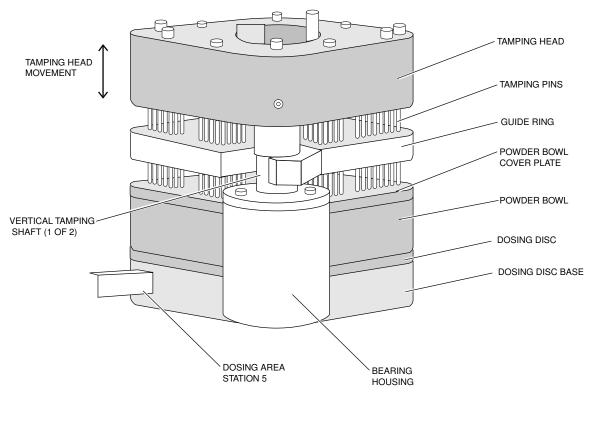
Location of Tamping Components Above Dosing Area Tamping Pins, Blocks, and Head - The tamping pins within the capsule-filling area are grouped inside of six tamping blocks. Each block contains 16 tamping pins. The tamping blocks are mounted inside the tamping head, which is moved up and down by two vertical shafts attached to a drive assembly powered from the machine's main cam. *(The tamping cam and tamping activities*)
